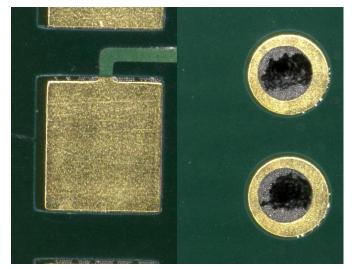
Solder Balls Wedged into No Solder Mask Defined Channels and Via Holes
